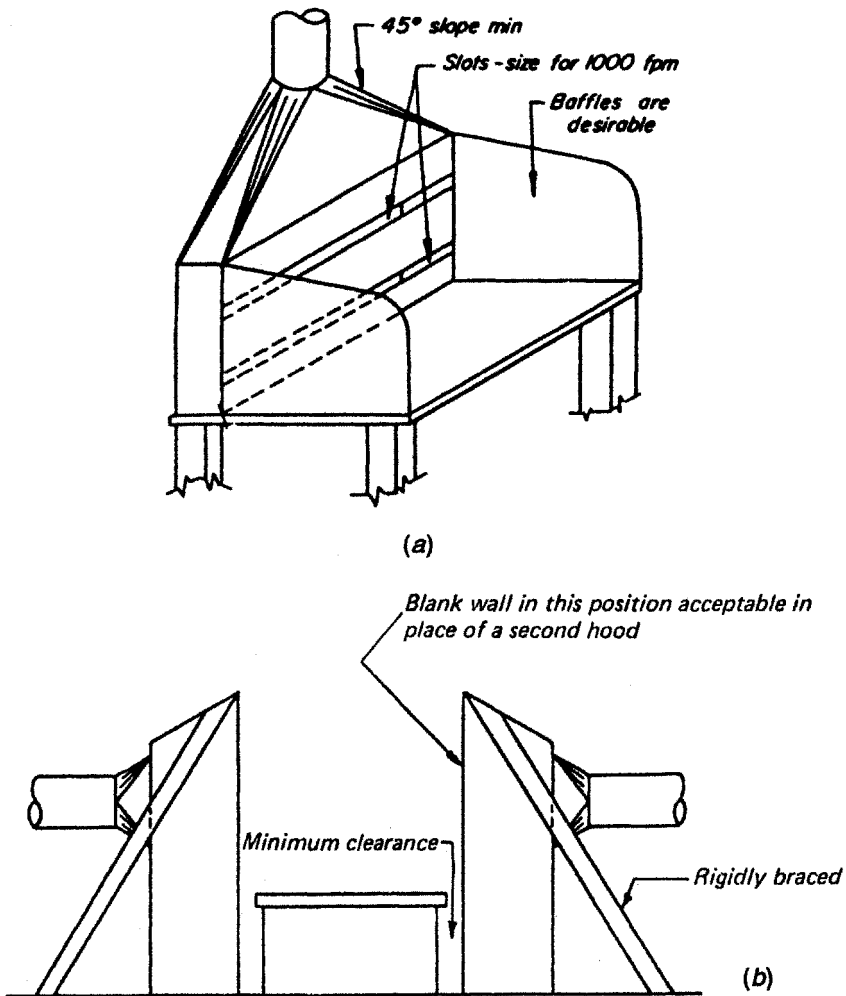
Partially enclosing exterior hoods: (a) welding bench with end baffles; (b) double side-draft foundry shakeout hood. [After Hagopian and Bastress (1976).]
